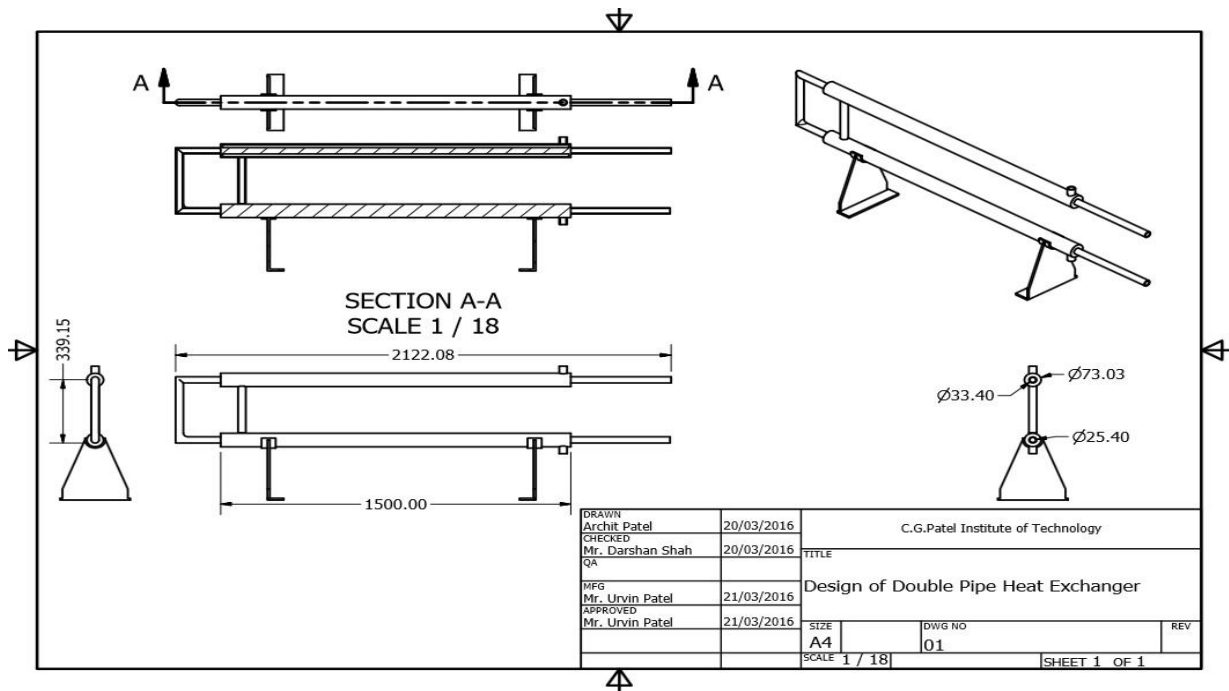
Design and Dimensional specification of Heat exchanger
